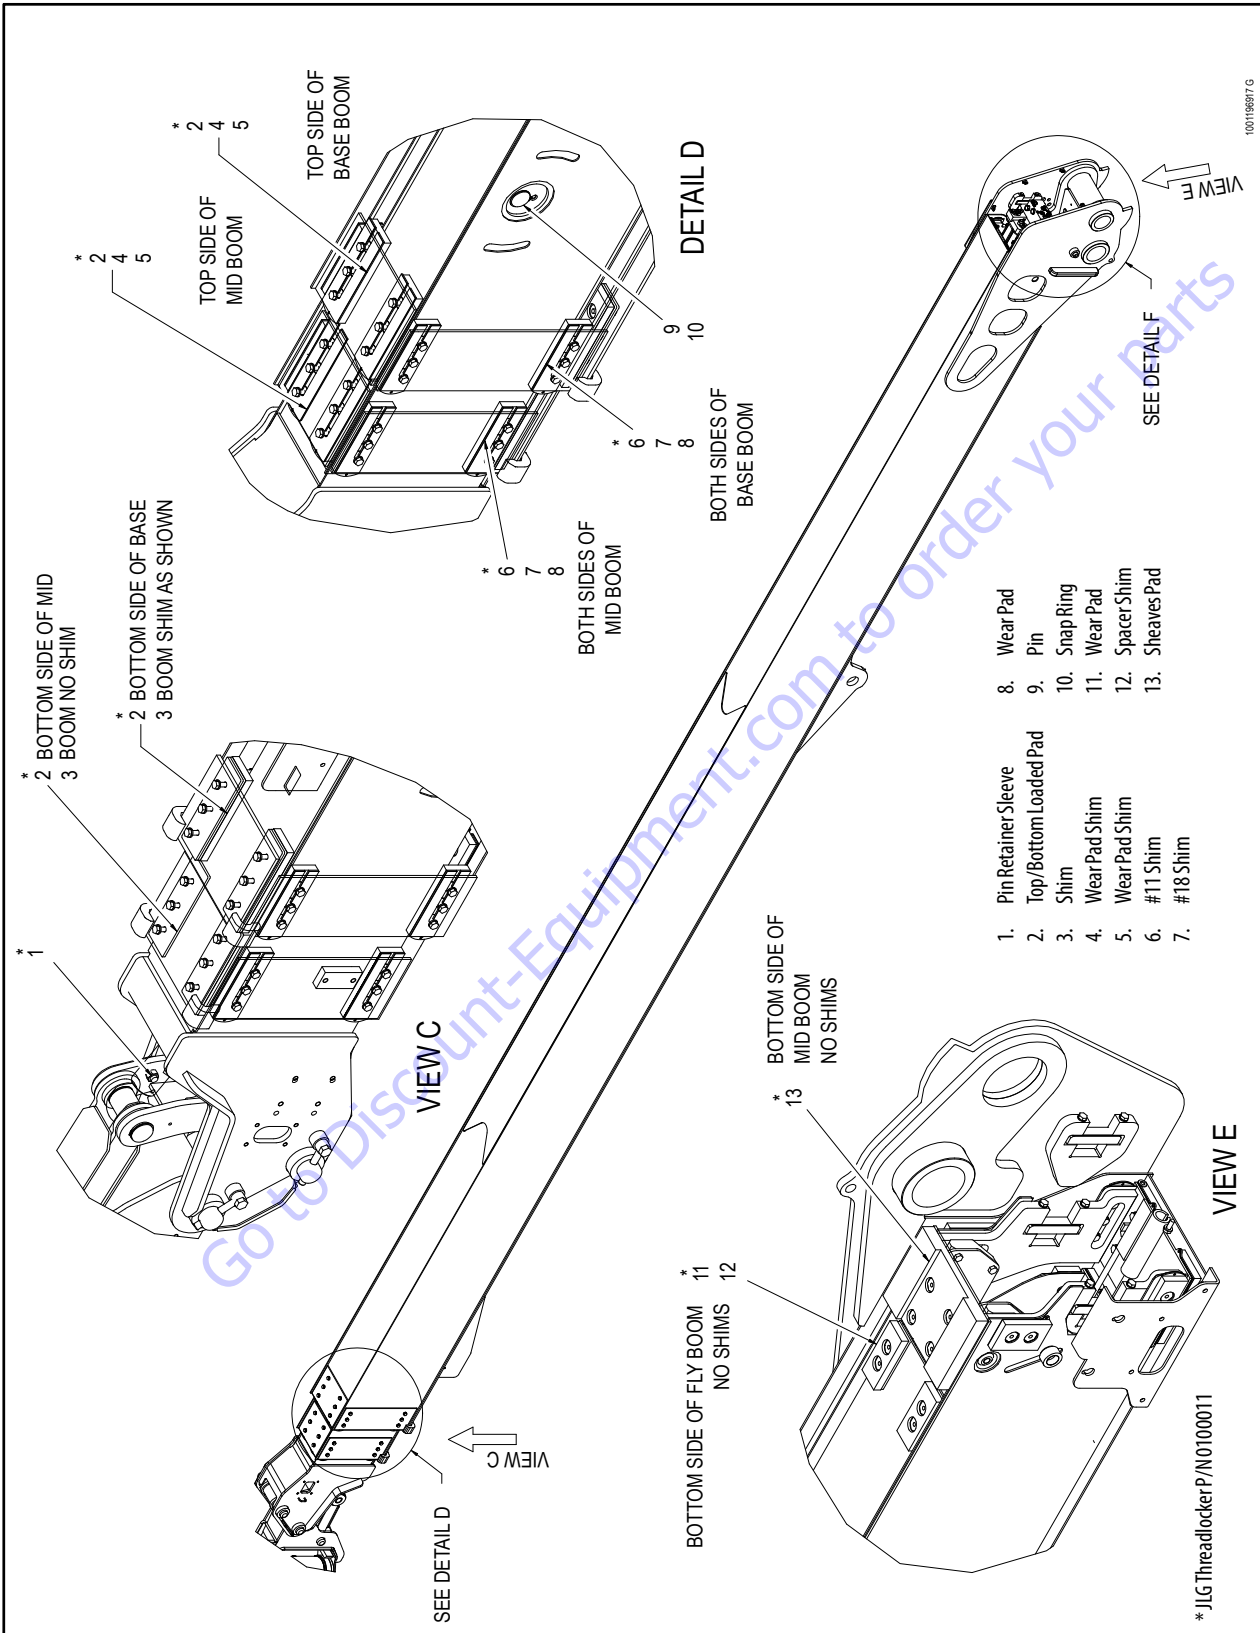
Main Boom Assembly - Sheet 4 of 7
